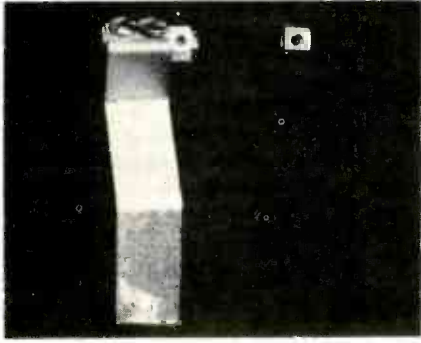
DETAILS OF HINGE used in finger-type end-effector assembly.
